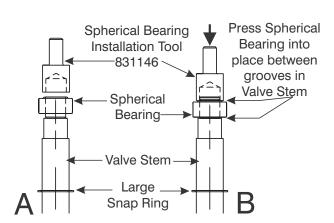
Press Spherical Bearing into place on the Valve Stem.
